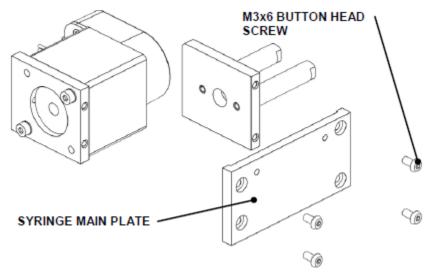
Removal of Back Guide Bar Assembly (item with two rods) and the Syringe Main Plate
